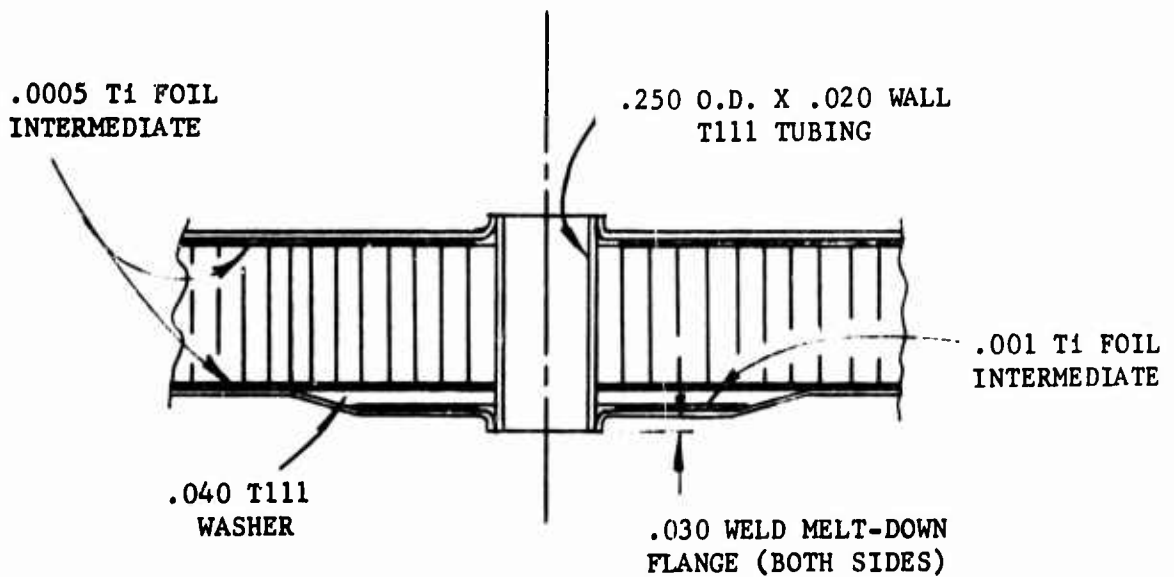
HEAT SHIELD PANEL SHOWING WELDING REQUIREMENTS AND LOCATION
